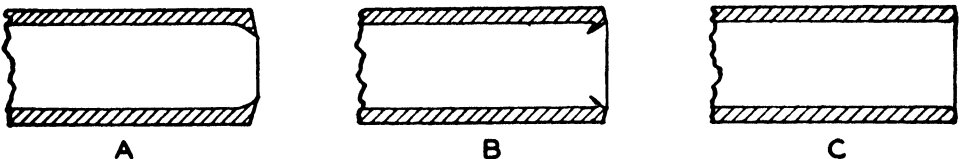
At *A* is shown the burr made by a pipe cutter. At *B* is shown improper reaming. At *C* is shown pipe properly reamed.
